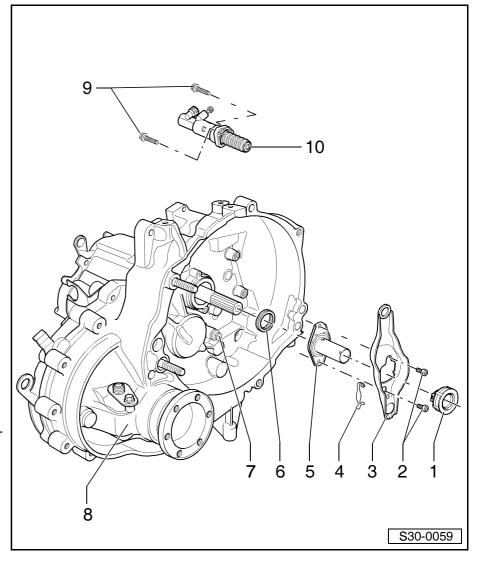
Removing and installing the clutch release | lever with the clutch release bearing and guide bushing for clutch release bearing
